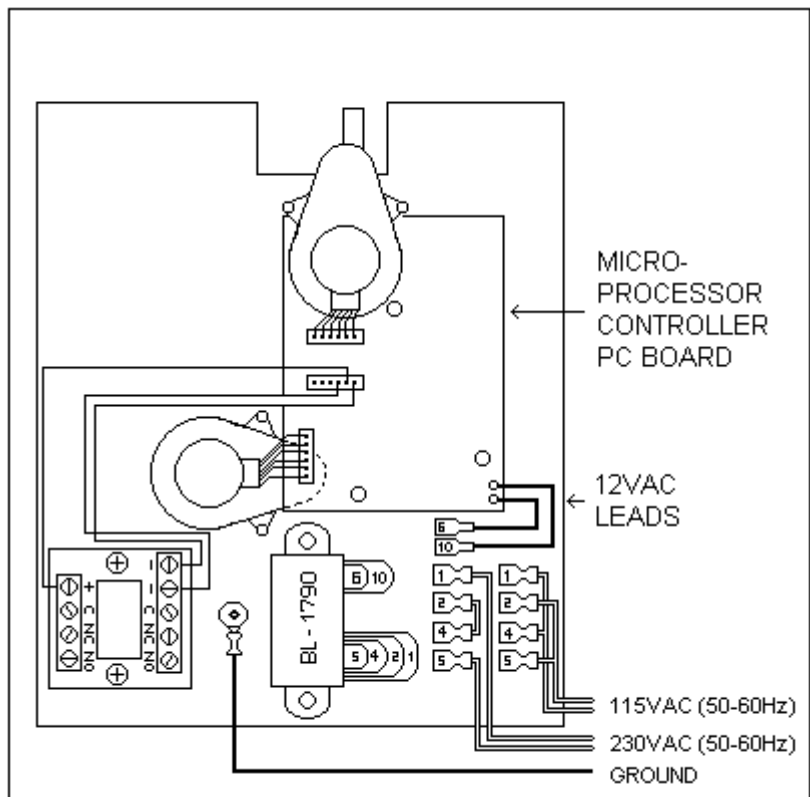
B: Recorder Assembly "Type A" with Electric Contact Option (Rear View).
